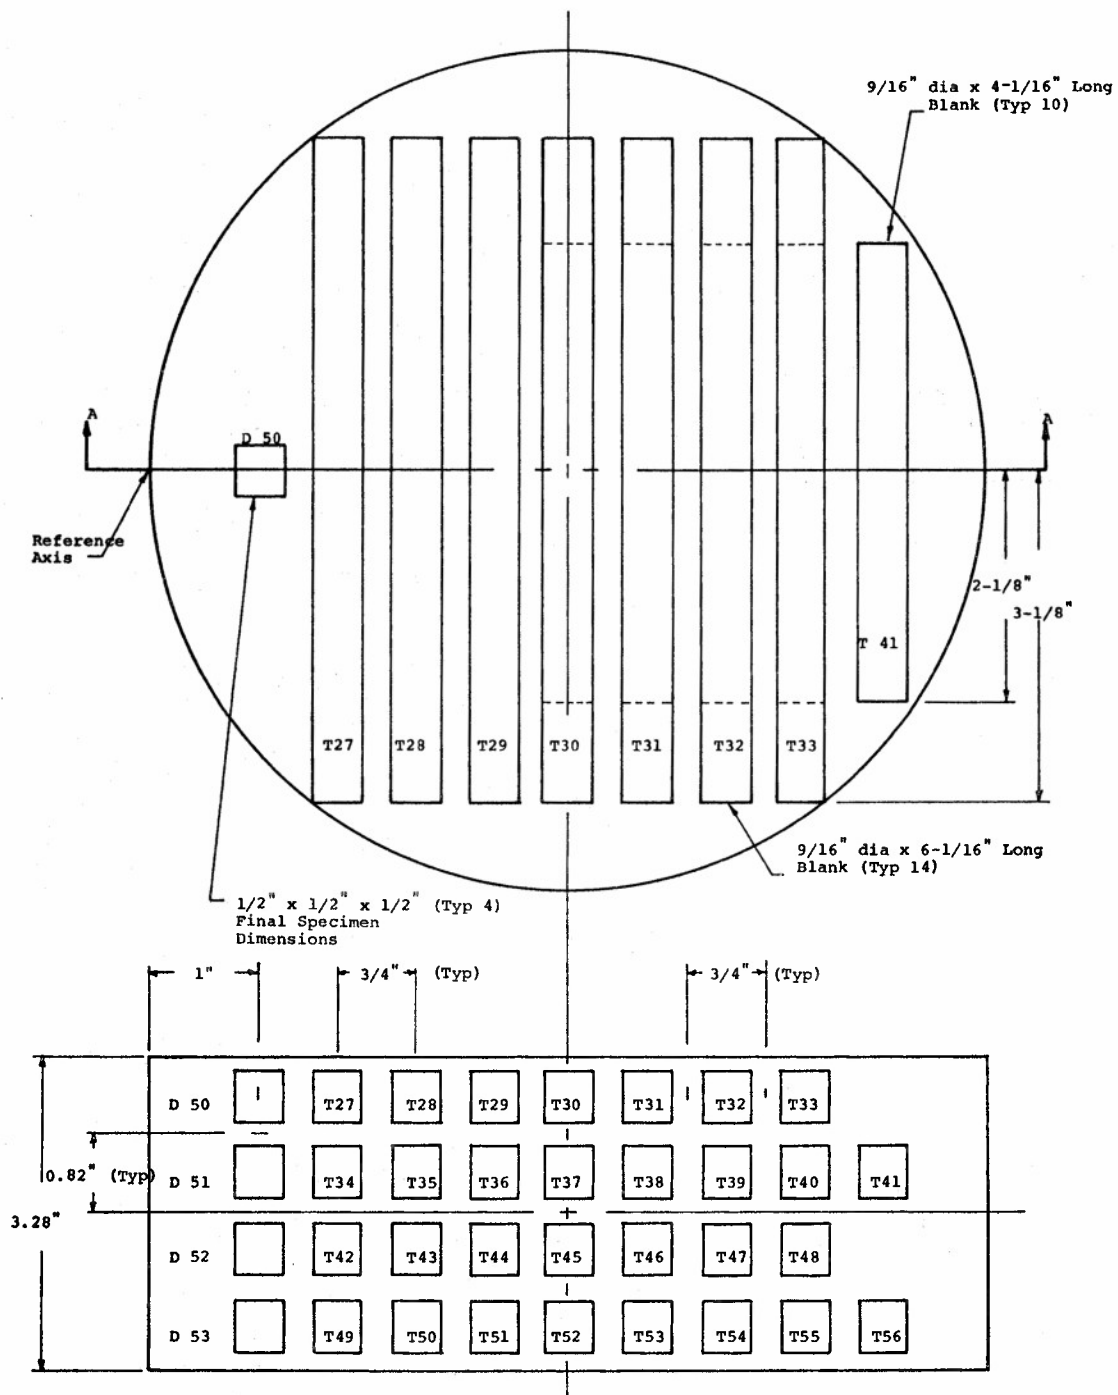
Specimen Blank Layout for Slab 2 of ATJ-S Billet L-4-6
